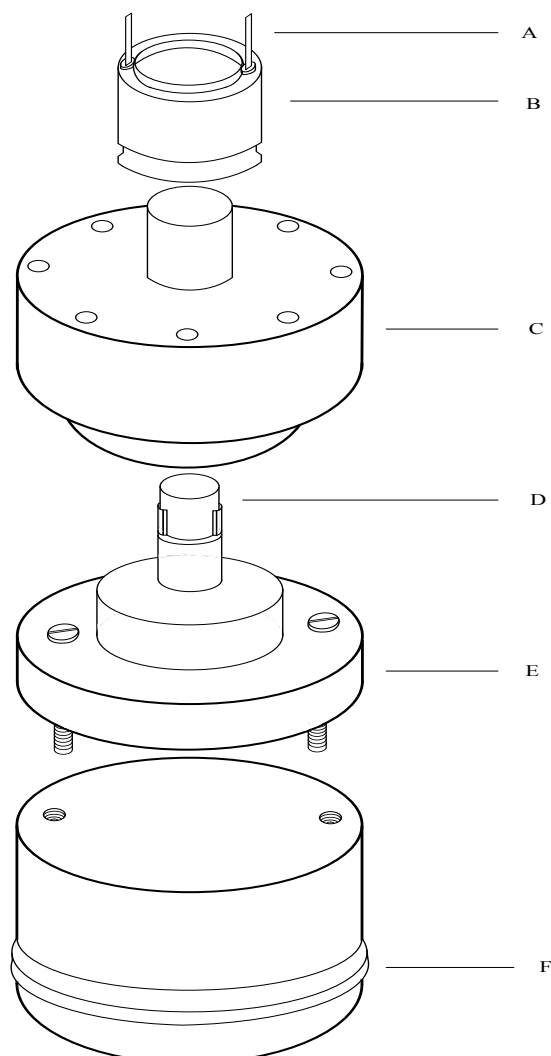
Top Flange Capillary sealing design. A-bolt, B- gland follower, C-PTFE gland packing, D-ROLSI™ capillary, E-bolt cap, G-Top flange. All dimensions in mm.
